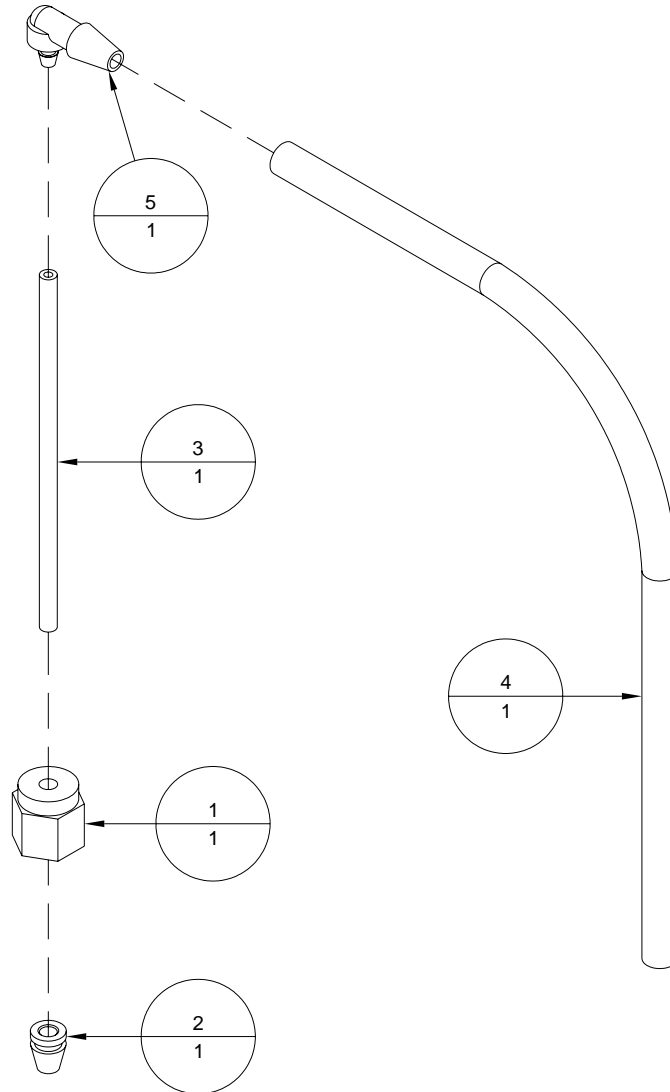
Ferrule Assembly, BK791 Upgrade (9103922A)
